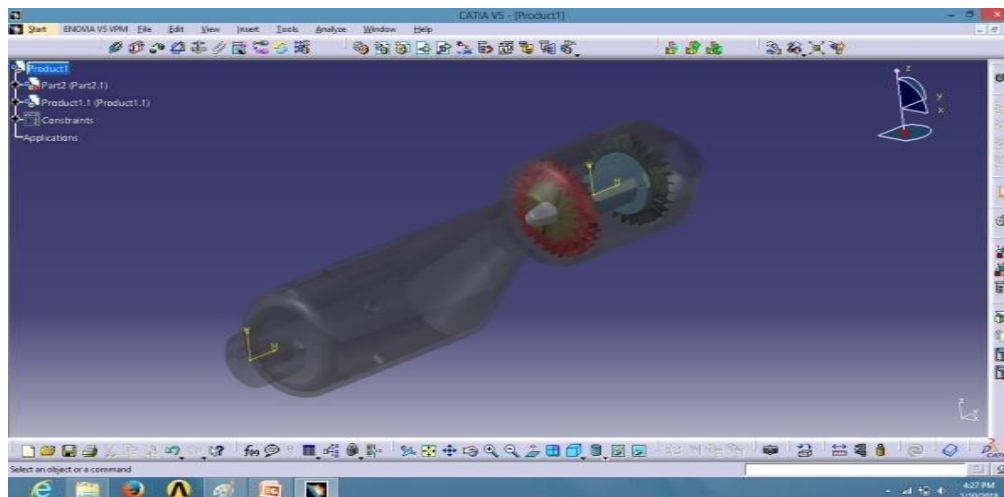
3-D Design Assembly of Combustion Chamber with Micro turbine
